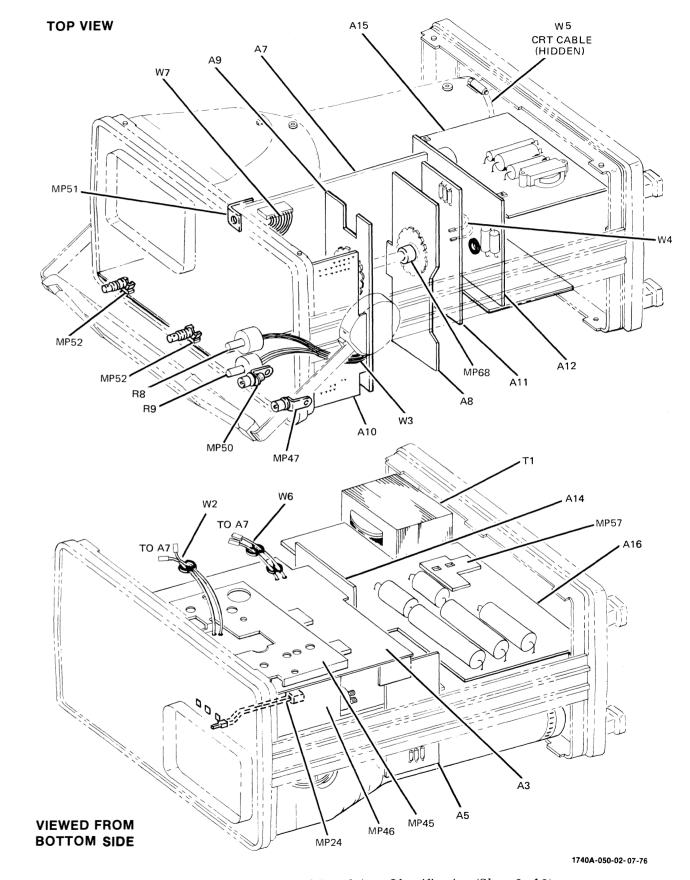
Chassis Parts and Board Assy Identification (Sheet 2 of 2)
